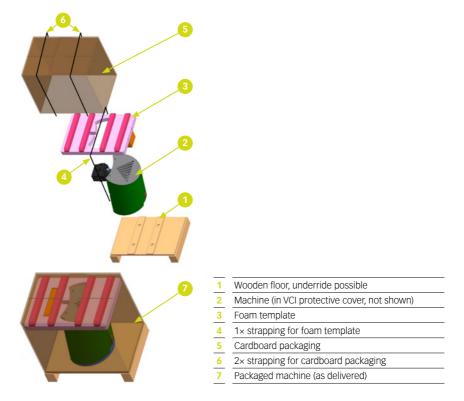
Schematic diagram of the packaging and the packaged machine, including identification of important components.
